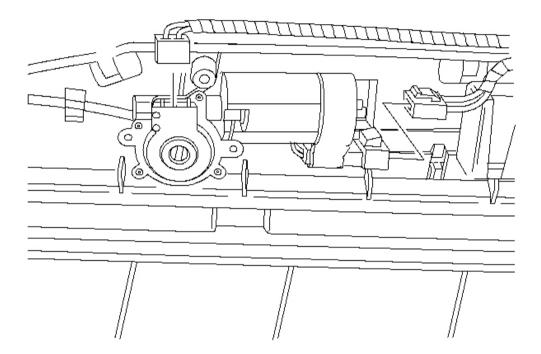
View Of Sunroof Motor/Actuator Courtesy of GENERAL MOTORS CORP.
